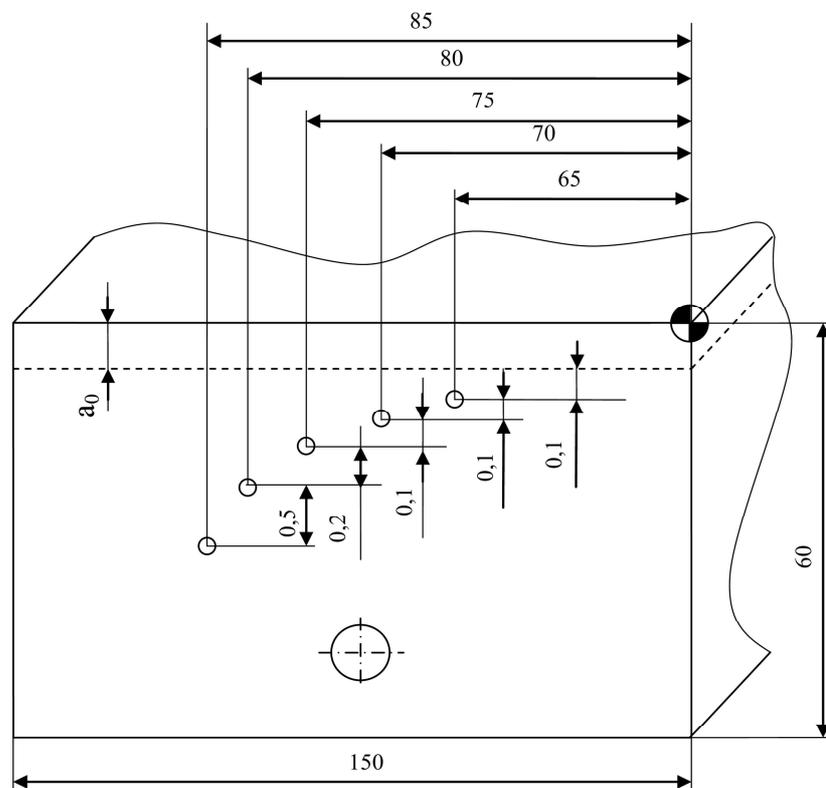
Schematic of thermocouple technique for measurement of surface temperatures during grinding
